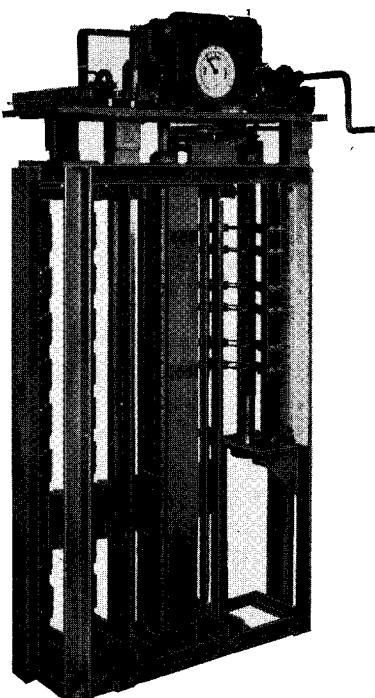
TYPE UR TAP CHANGER MECHANISM ASSEMBLY AS REMOVED FROM TANK
